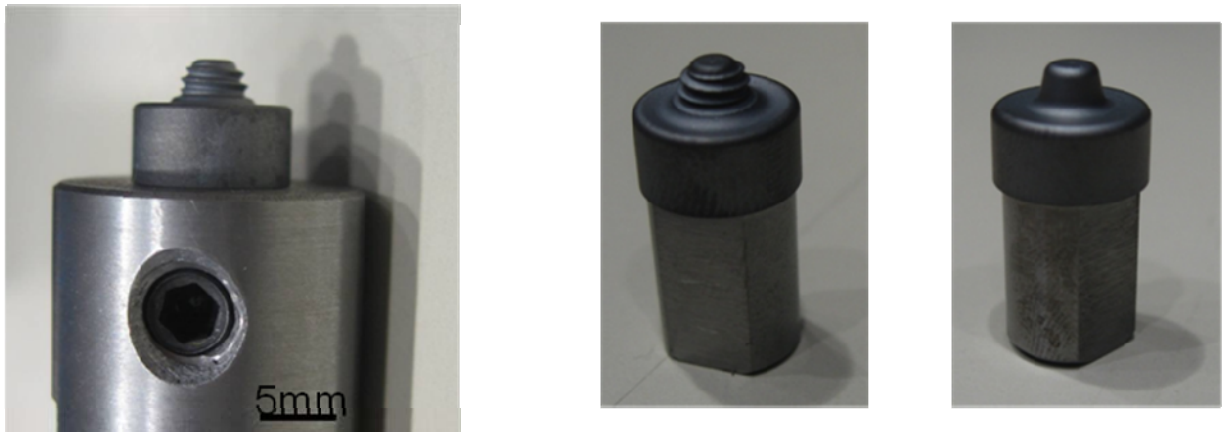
Tool concept for FSSW of steel; tool holder with WC-Co insert (left); WC-Co inserts with different geometries (middle and right)
